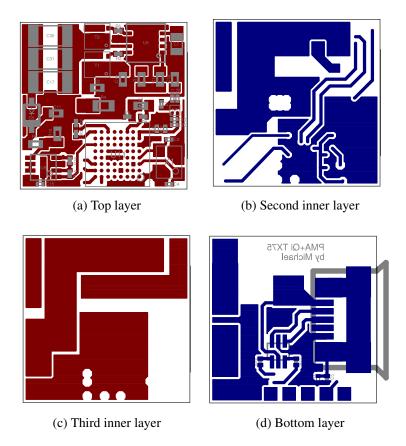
Four layer layout, top view, of the miniaturized wireless power transmitter
